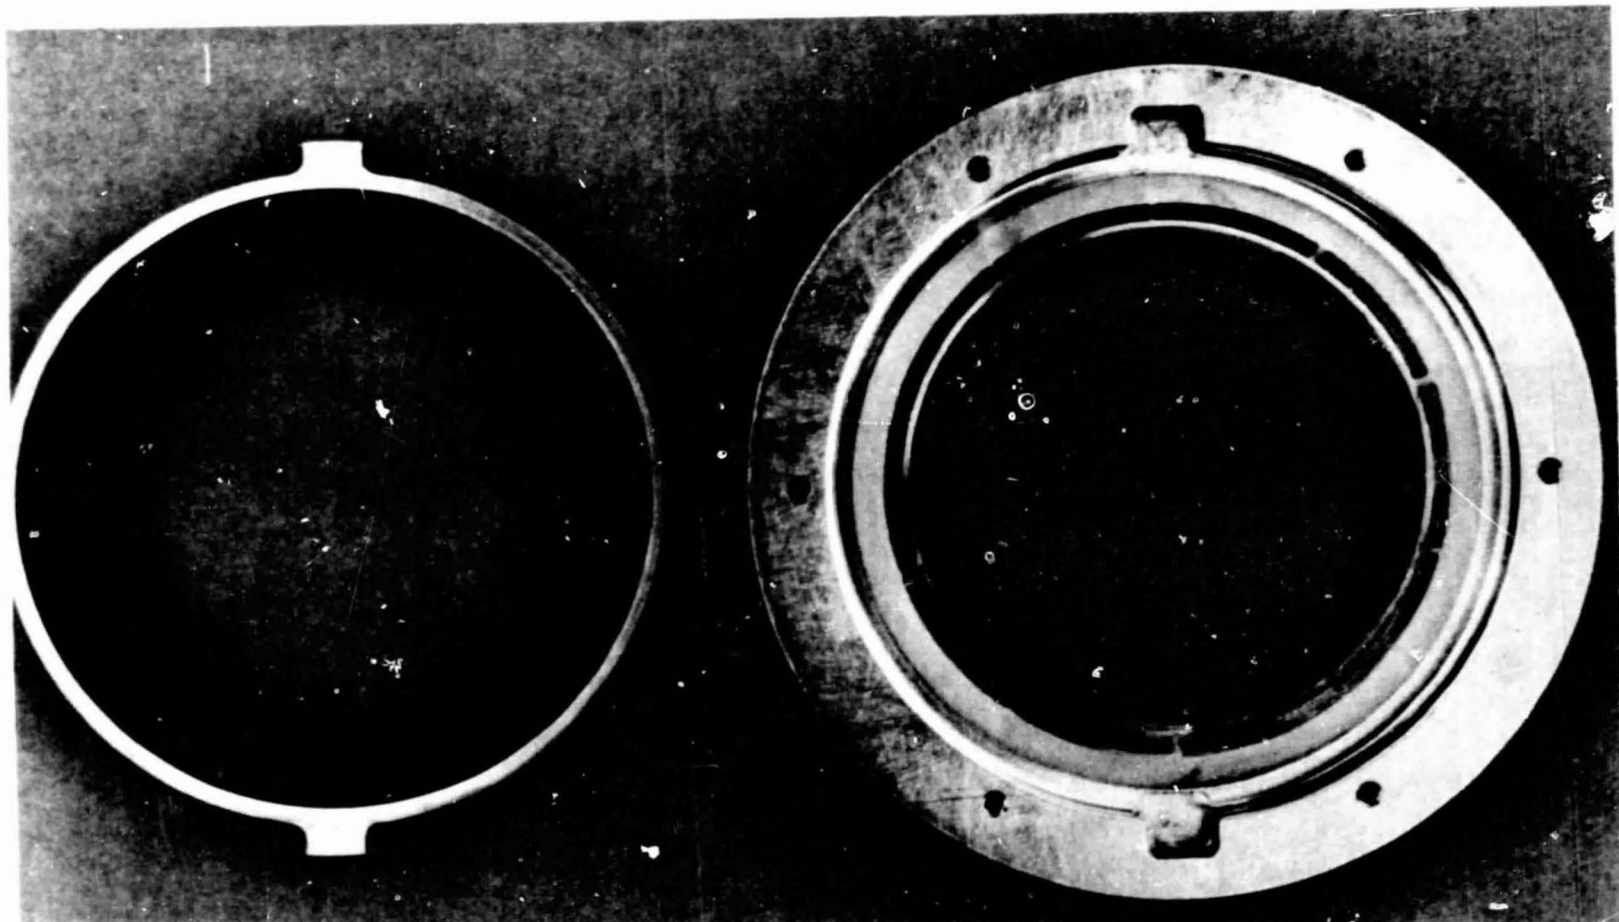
Turbine End Secondary Seal, P/N 7R0011526, S/N 047901,
